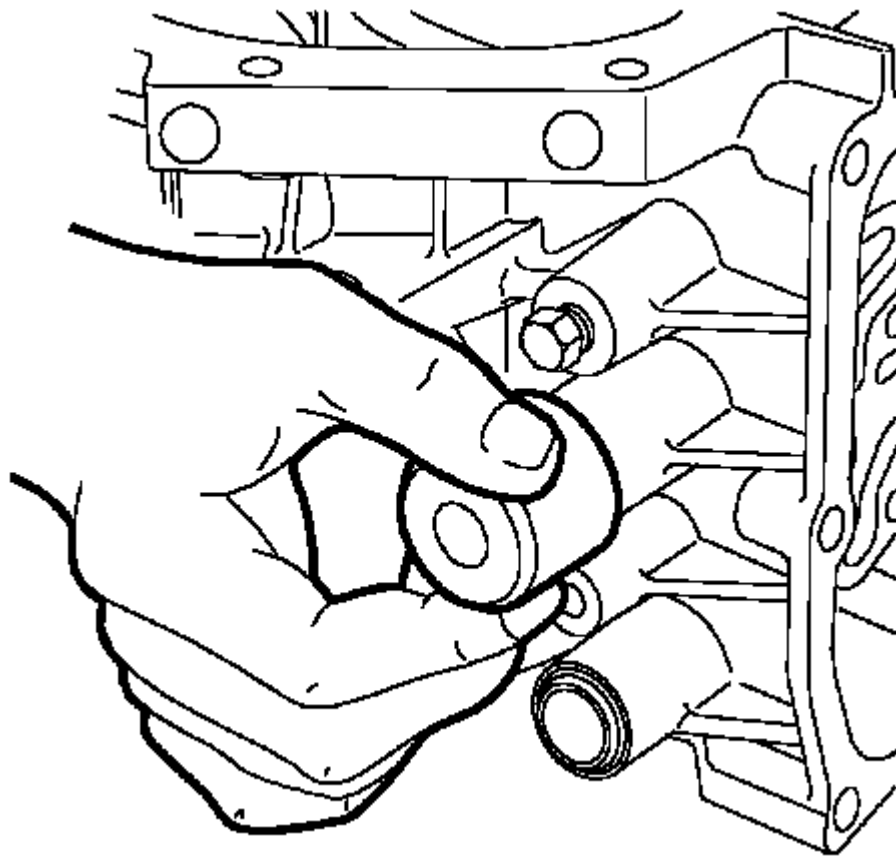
View Of Nub Of Cooler Line Seal Installer & Transaxle Cooler Line Seal
